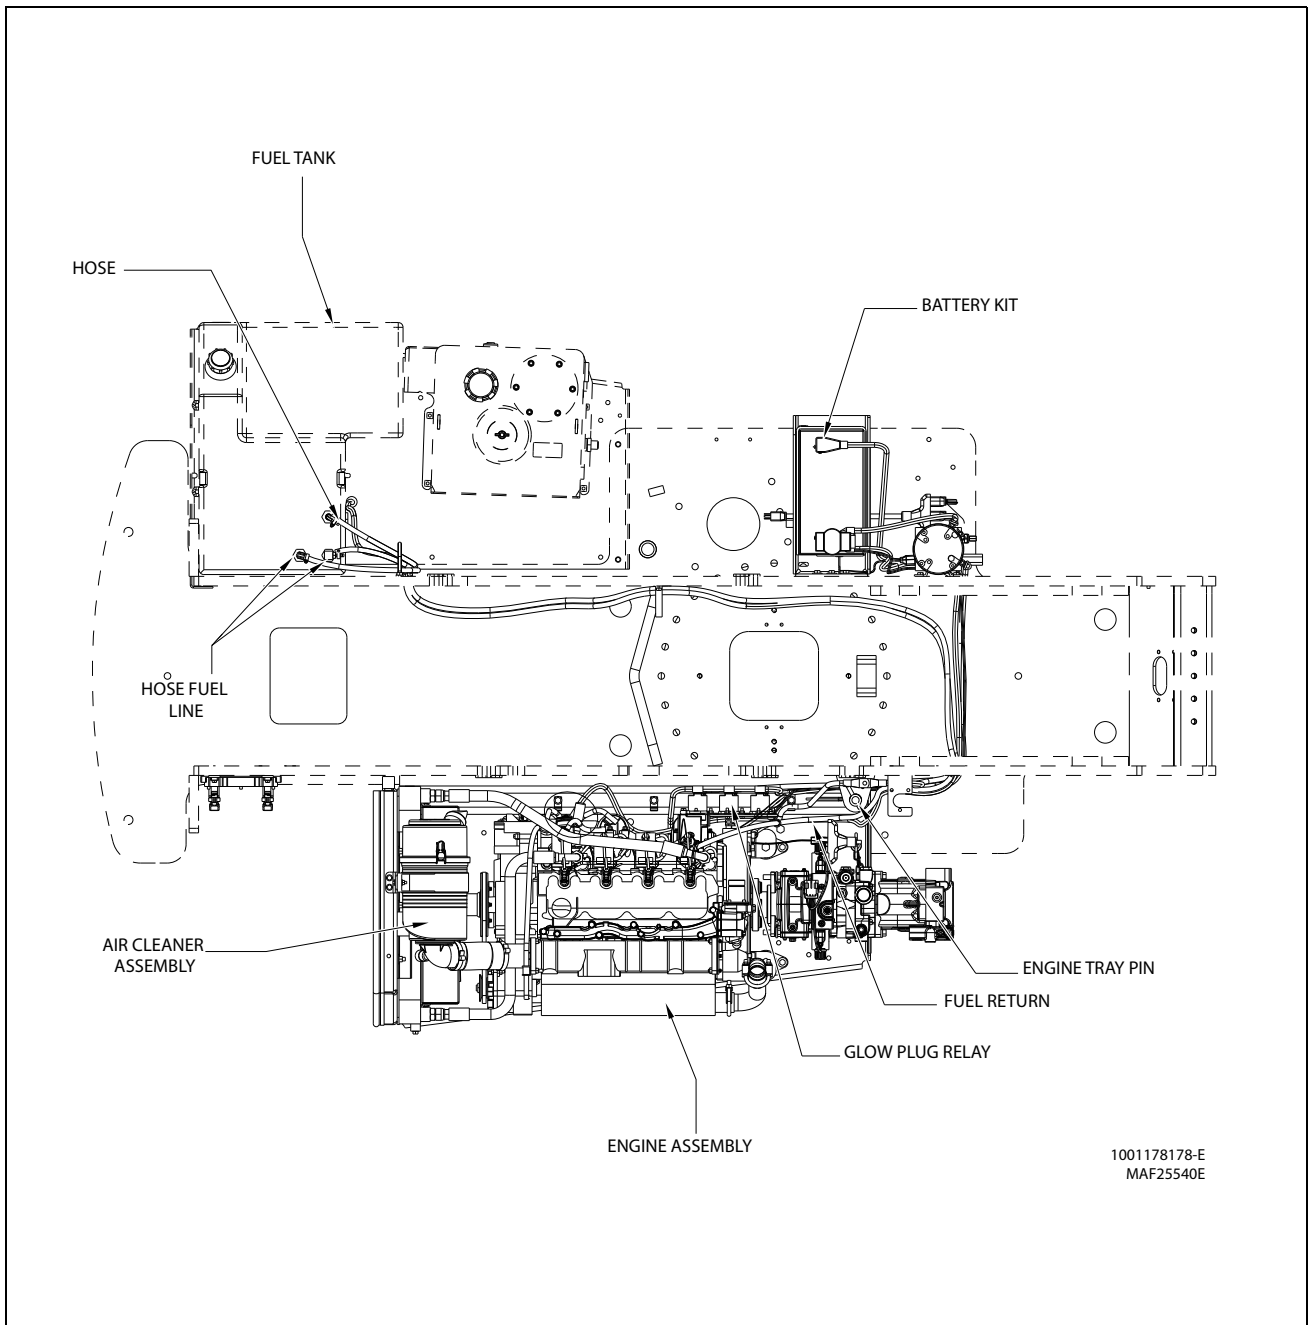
Deutz T4I (Arctic) Engine Installation - Sheet 1 of 2
